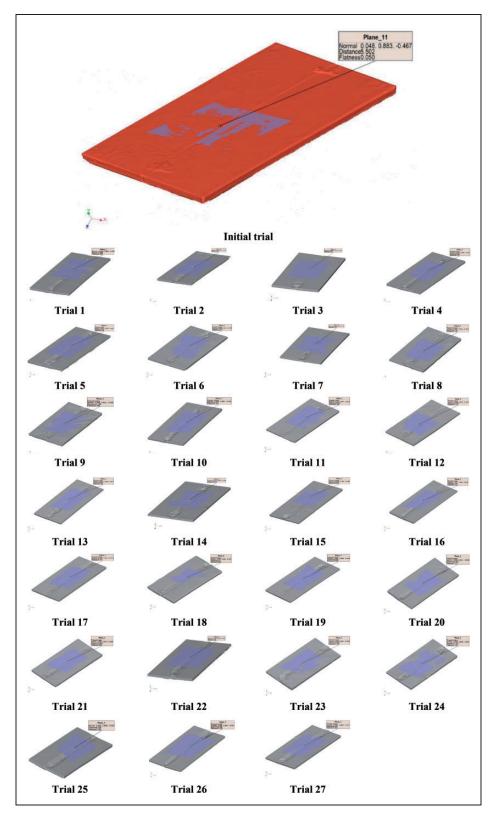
Flatness values of the welded joints fabricated by FSW technique on various 3D printed parts.
